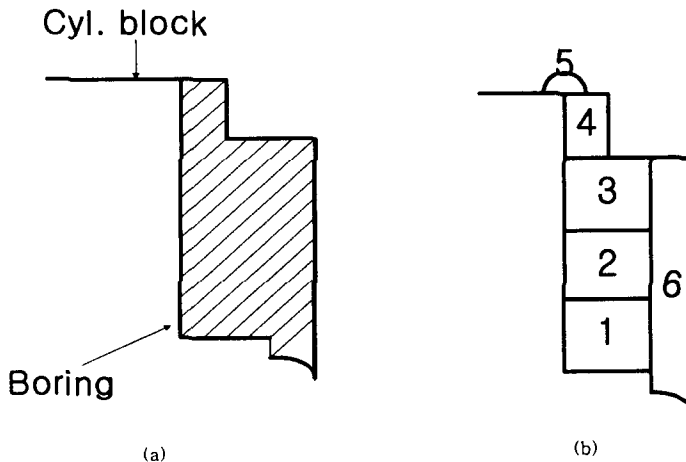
The repair welding method for cylinder block packing seat of diesel engines
